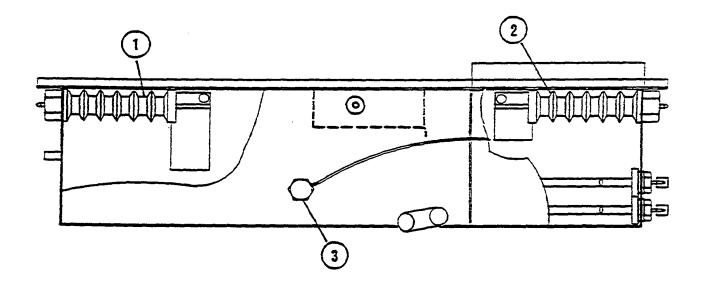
LEFT SIDE VIEW - Steam Generator Assembly\
